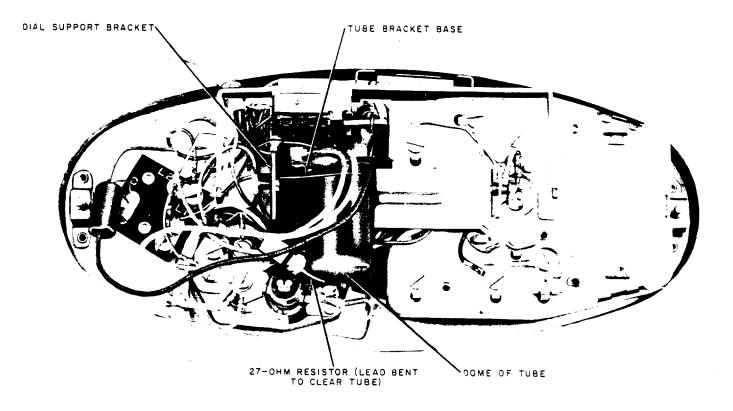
Cold-Cathode Tube Installation in 702-Type Telephone Set
